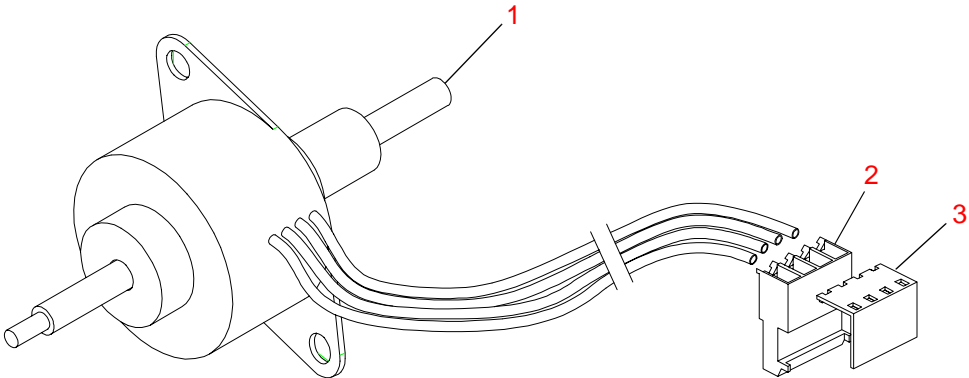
VL6B/VL6C Zoom Optics Motor Assembly
